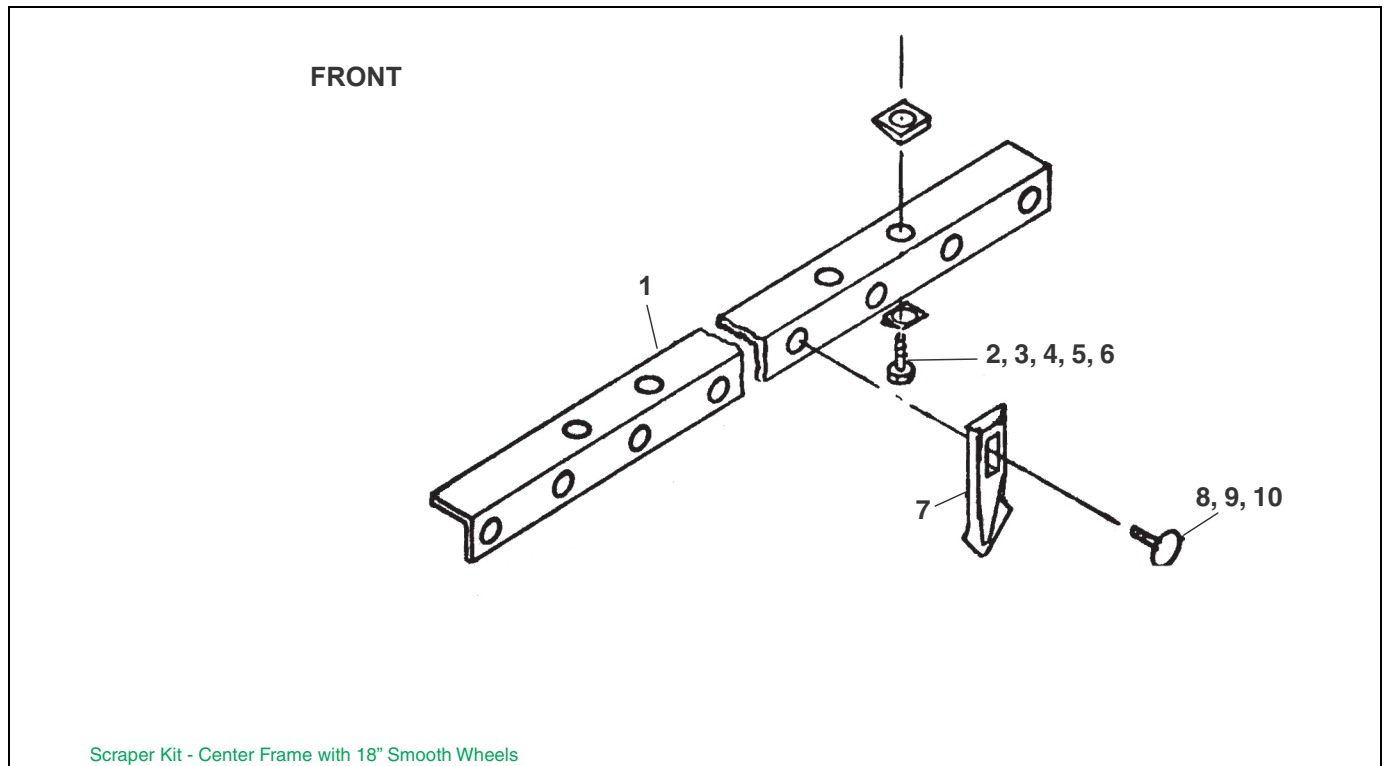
Scraper Kit - Center Frame with 18" Smooth Wheels - Optional
